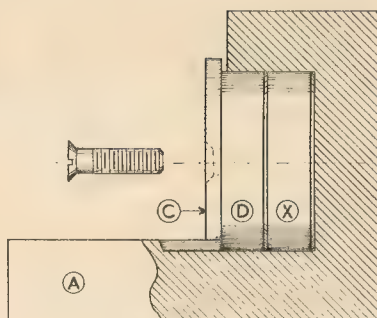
Part-sectional view of the base casting: (C) the bearing clamp plate; (D) distance collar; (X) the self-aligning ball-bearing
